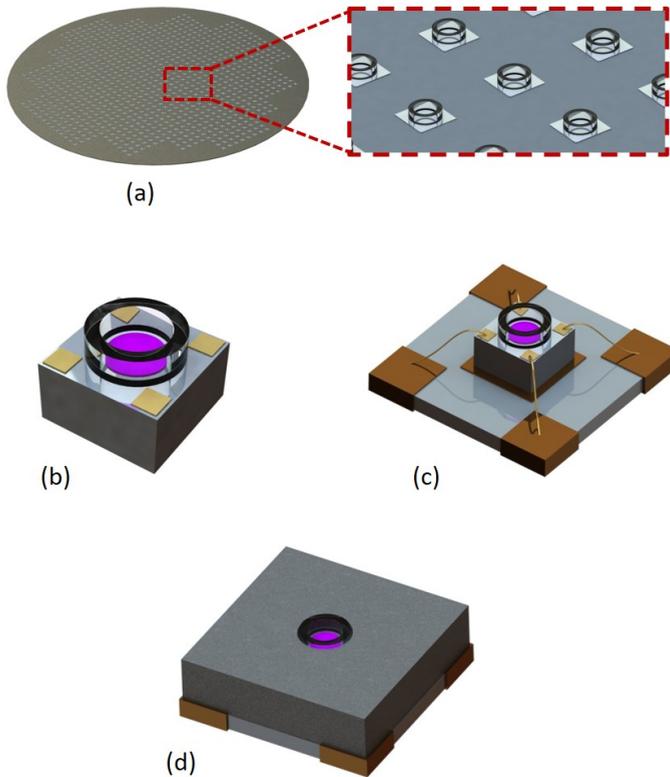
3D schematic of the TPVH-W-QFN fabrication process. (a) Hollow SU-8 structures fabricated on a silicon wafer, (b) a single die with micro hollow SU-8 structure, (c) the assembly of the QFN substrate, the die and wire bonds, (d) the molded package with a micro through-hole.
